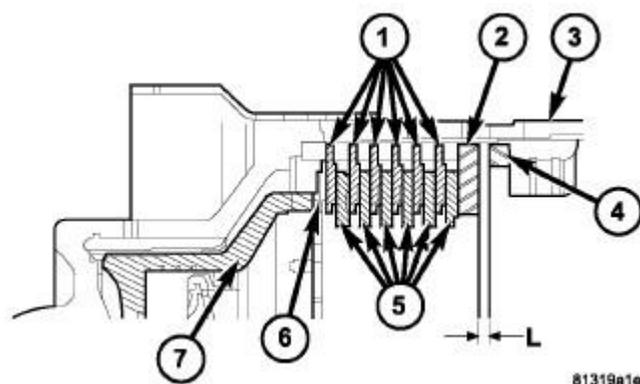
Input Clutch K1 Stack-Up - Single Sided Discs
